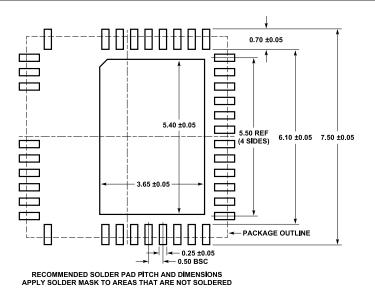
48(39)-Lead Plastic QFN (7 mm × 7 mm) (05-08-1792) Dimensions shown in millimeters
